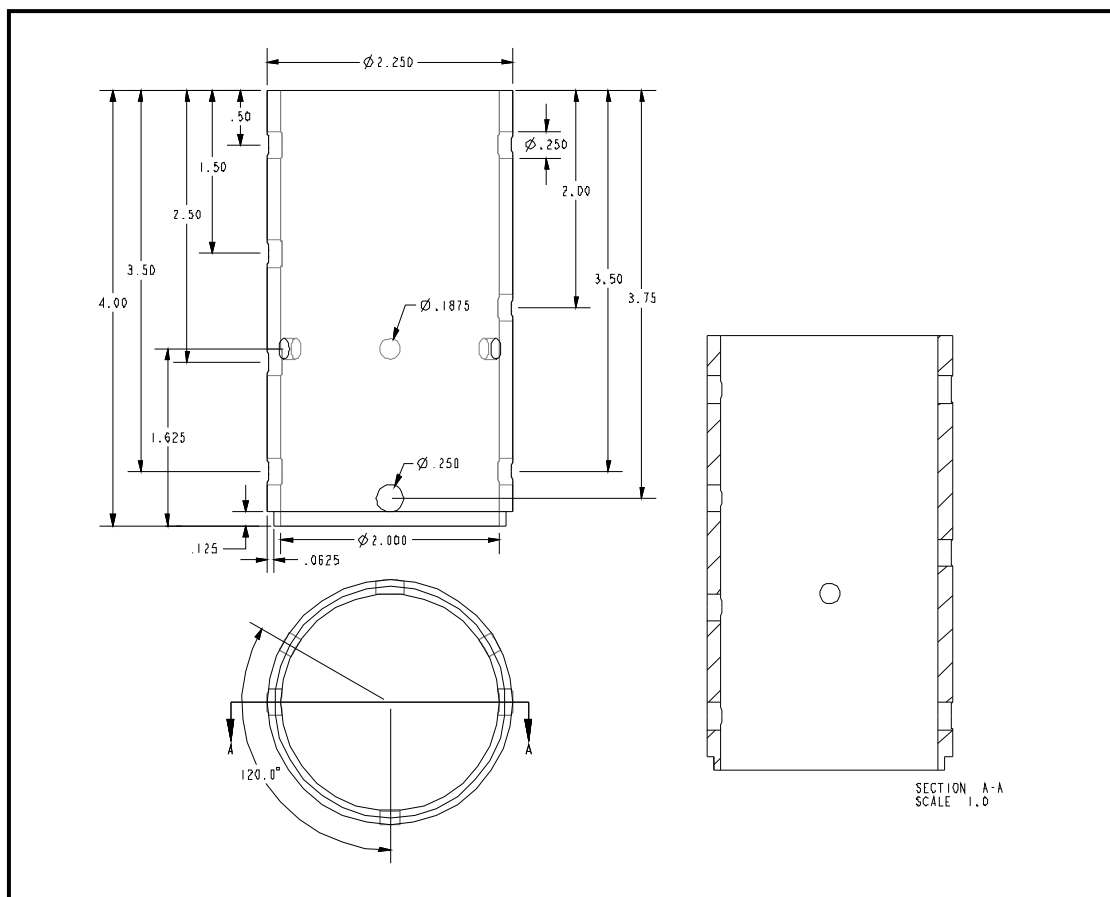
CAD Drawing of the 2nd Generation Injector – Main Mixing Section
